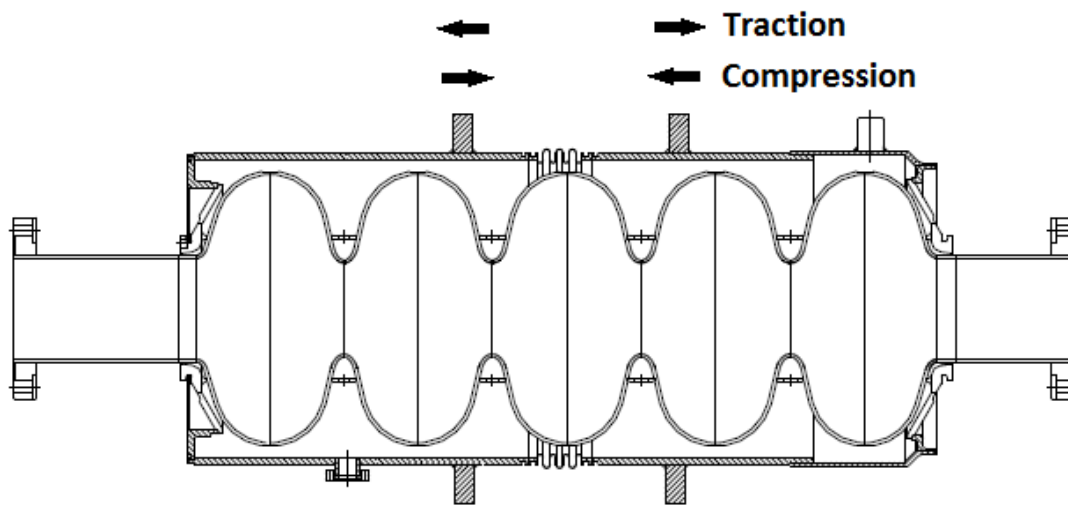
Scetch of the cross-section of the He tank bearing the cavity assembly [70]
